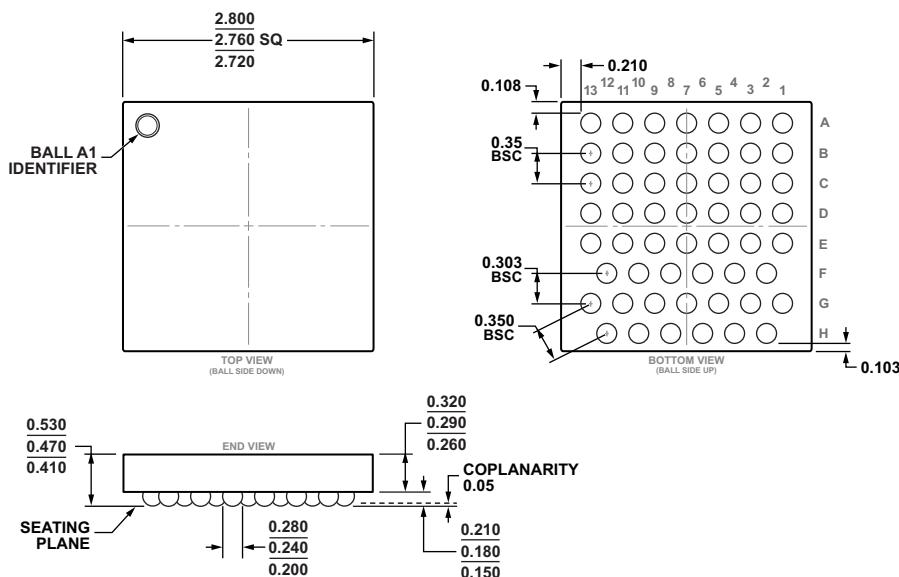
54-Ball Wafer Level Chip Scale Package [WLCSPI]
